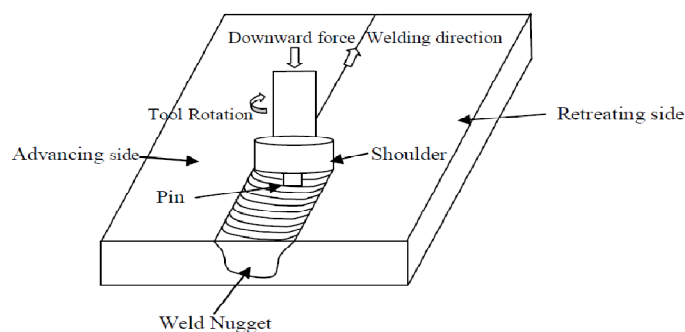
Schematic Diagram of Friction Stir Welding
